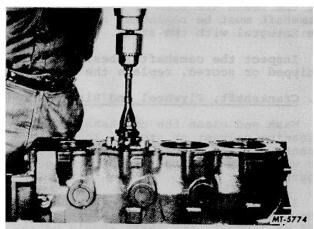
Honing Cylinder Bore Using SE-784 Cylinder Grinder
